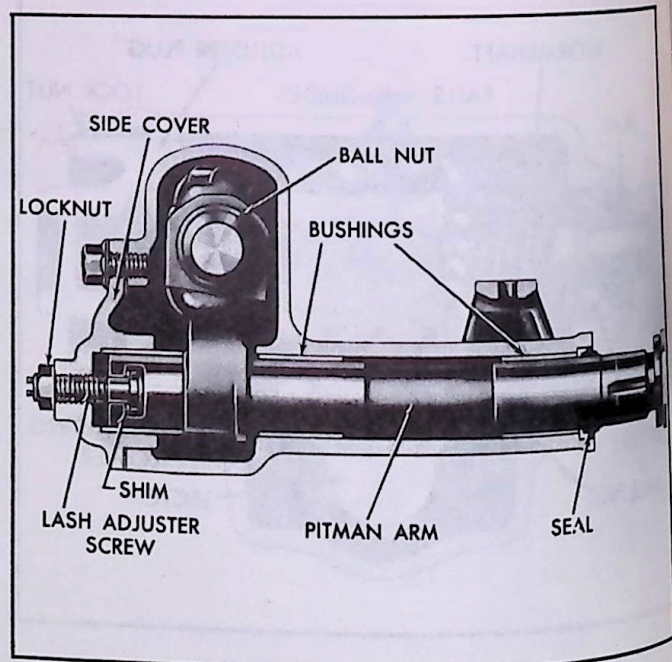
Steering Gear (Corvette and G10-30 Series Trucks)
